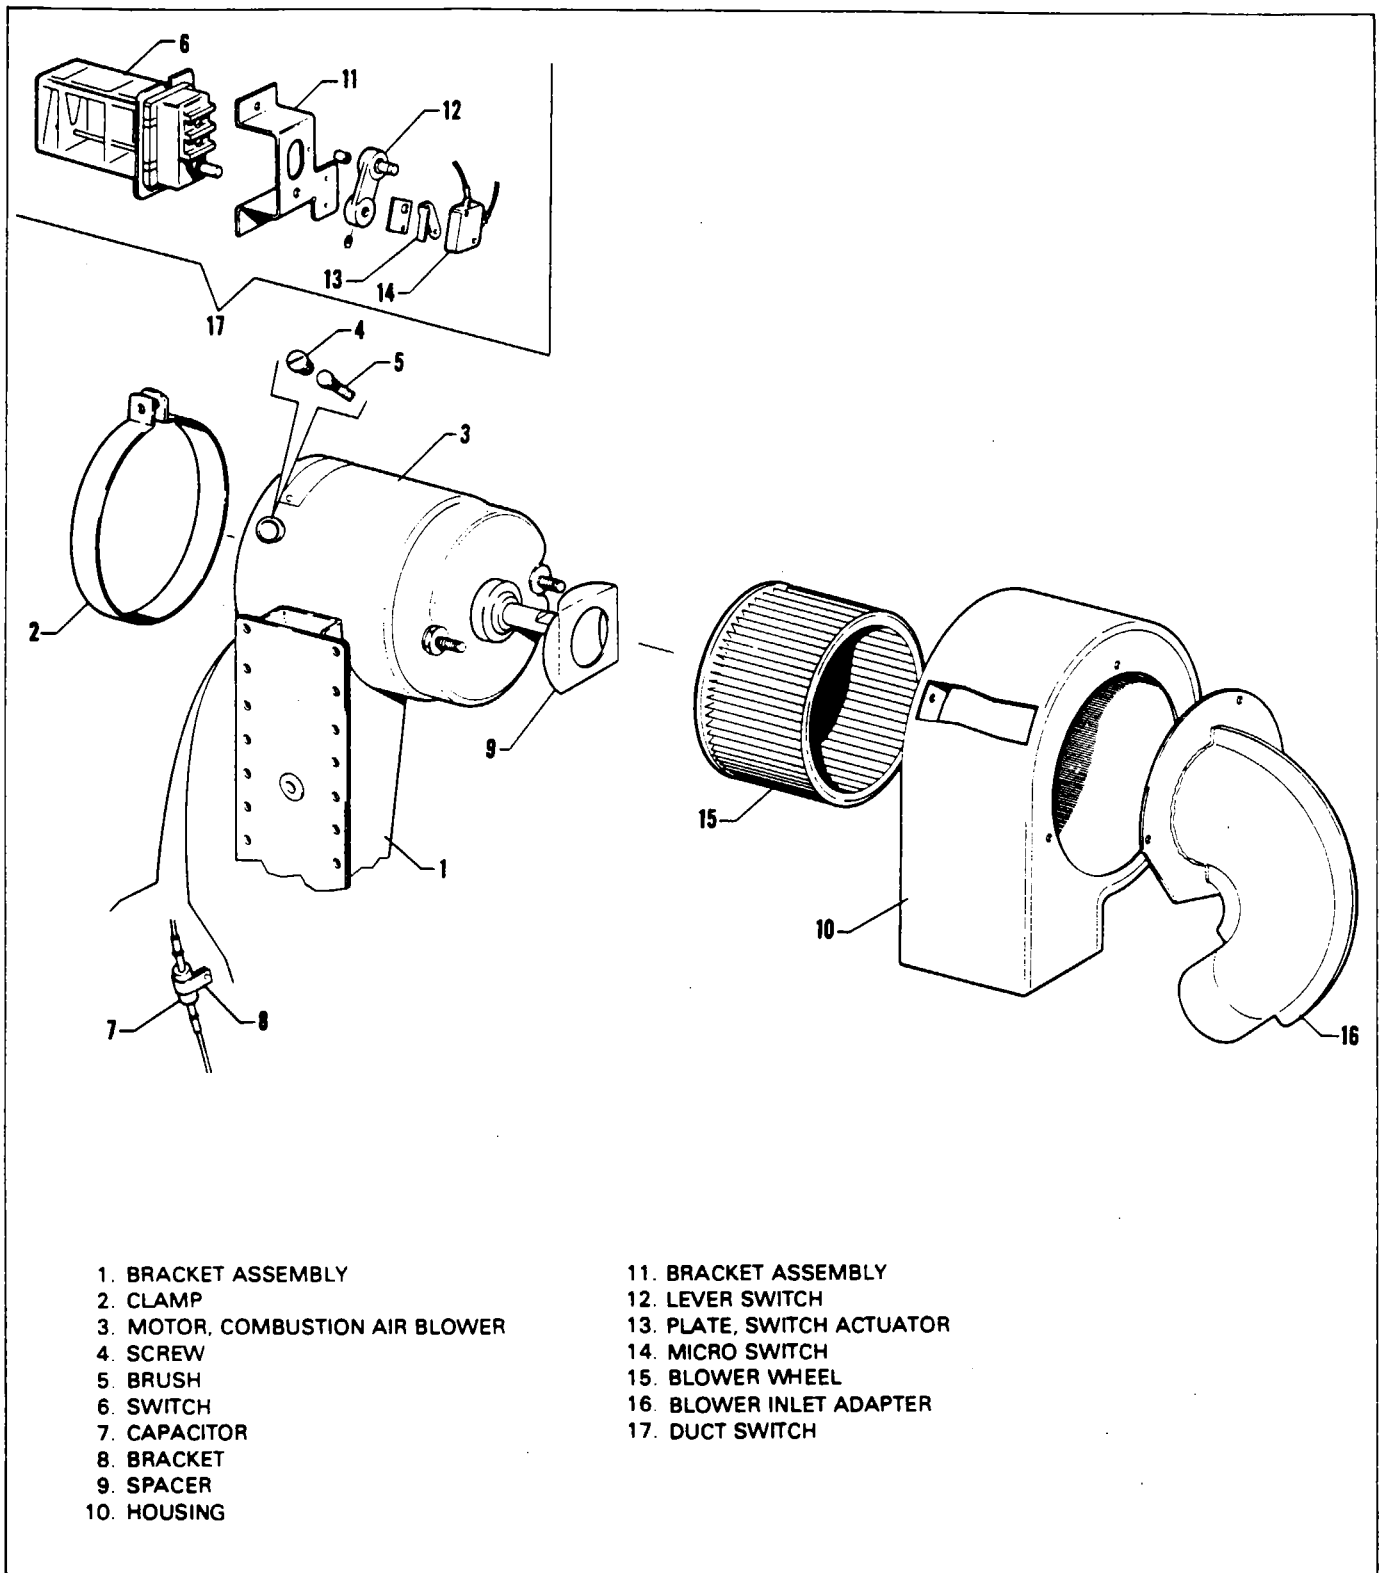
Exploded View of Combustion Air Blower and Motor Assembly
